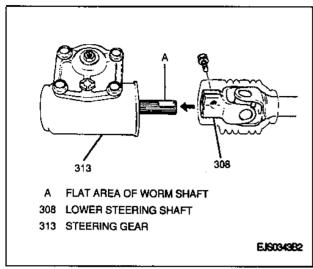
Lower Steering Shaft-to-Steering Gear Coupling
